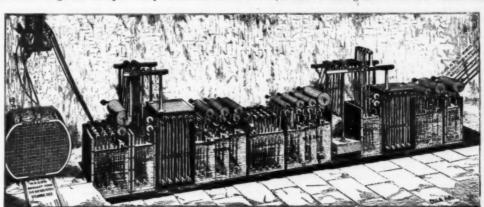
THE MATHER-THOMPSON CONTINUOUS CHEMICKING MACHINE.
